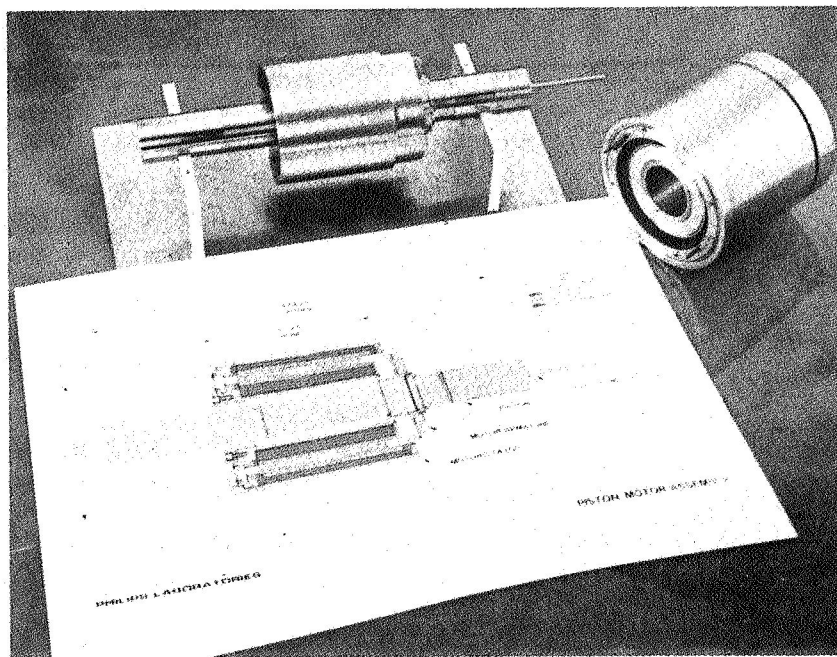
Piston motor showing armature mounted to shaft and stator assembly ready for insertion into motor housing.
